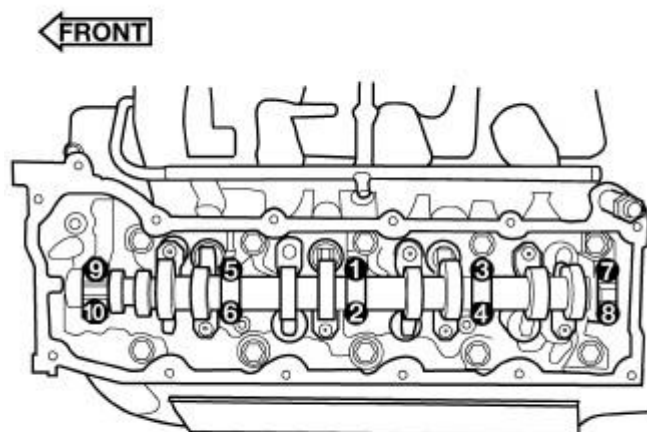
Camshaft Bearing Caps Tightening Sequence
